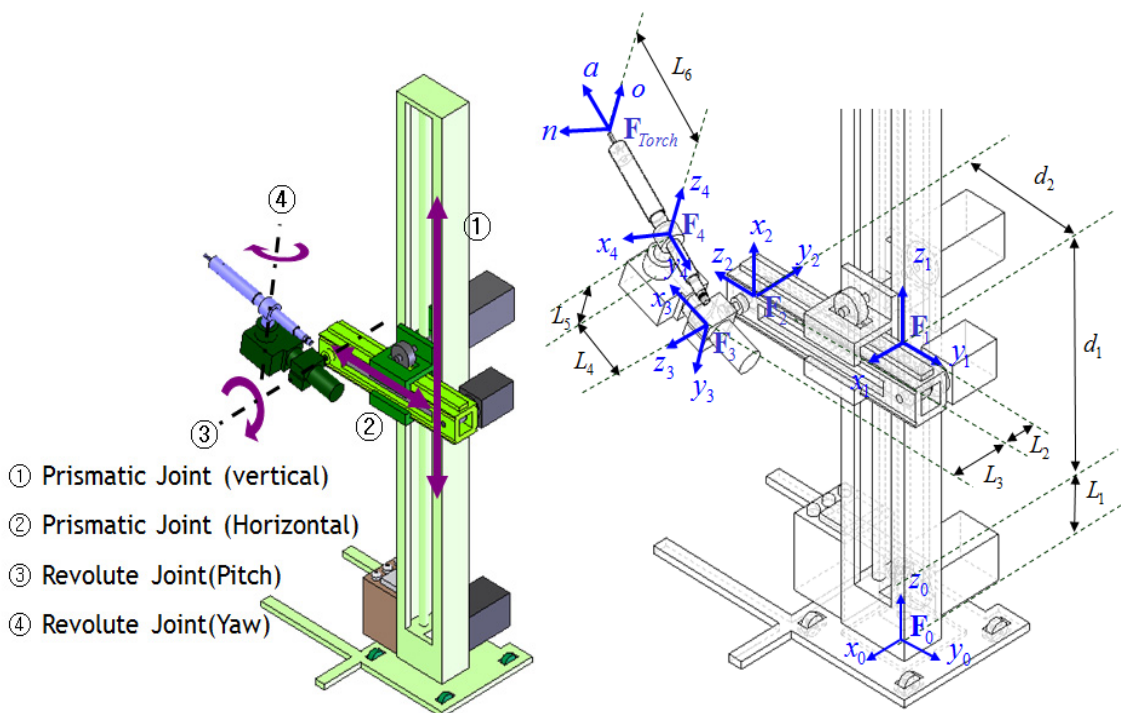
Coordinate and dimension system of the conceptual design of the portable type welding robot
